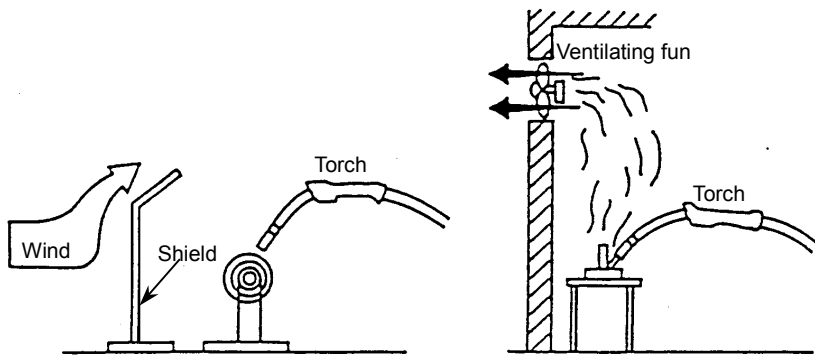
Shielding wind for welding Fig.2-5 Example of ventilation
